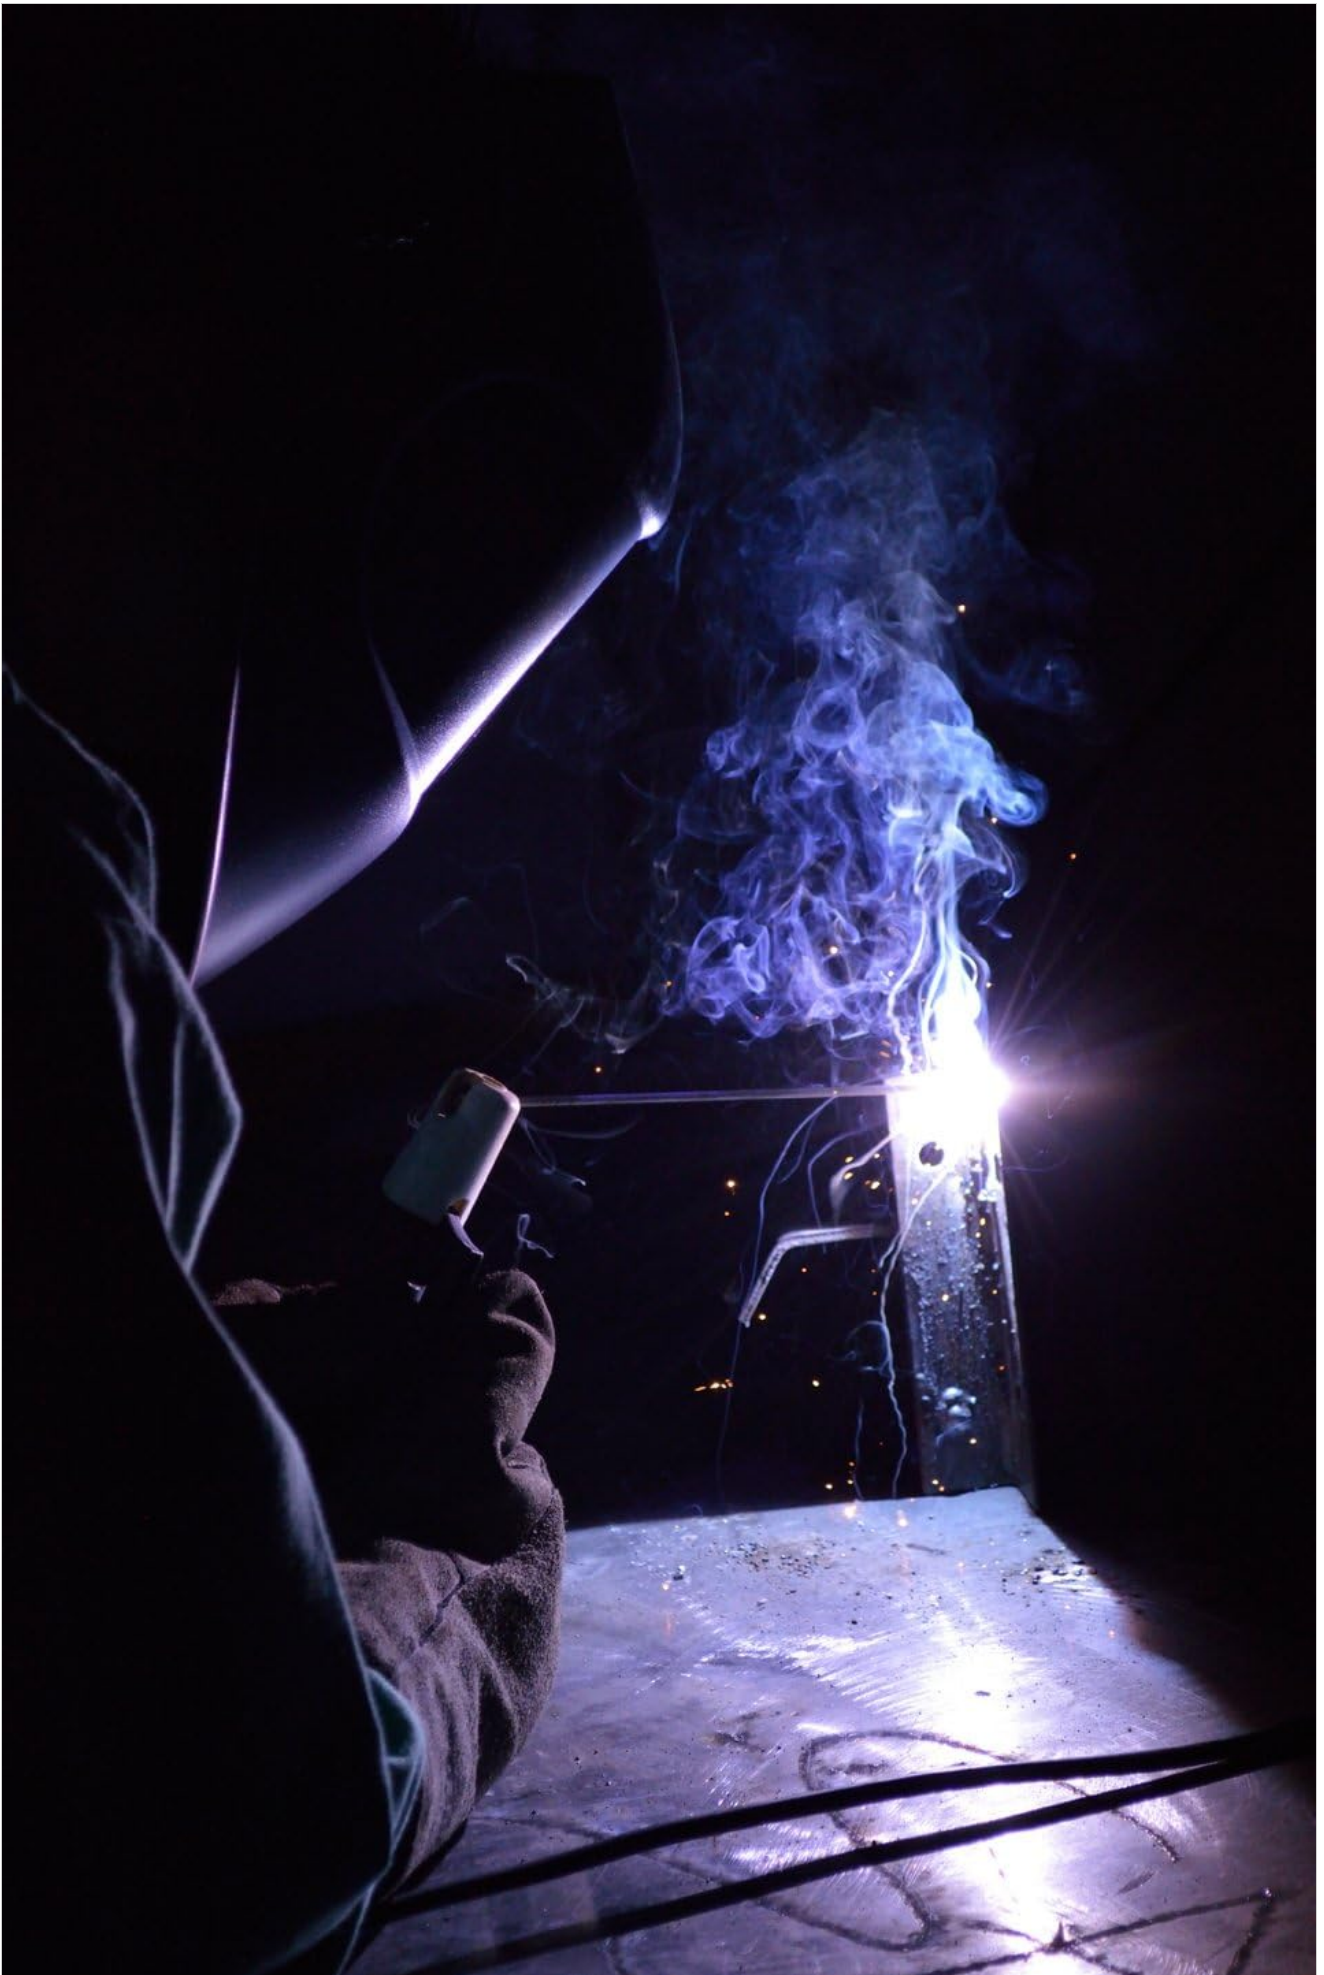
An illustrative image depicting the welding process, showing a bright arc and smoke, emphasizing the need for proper safety gear like a welding helmet.
